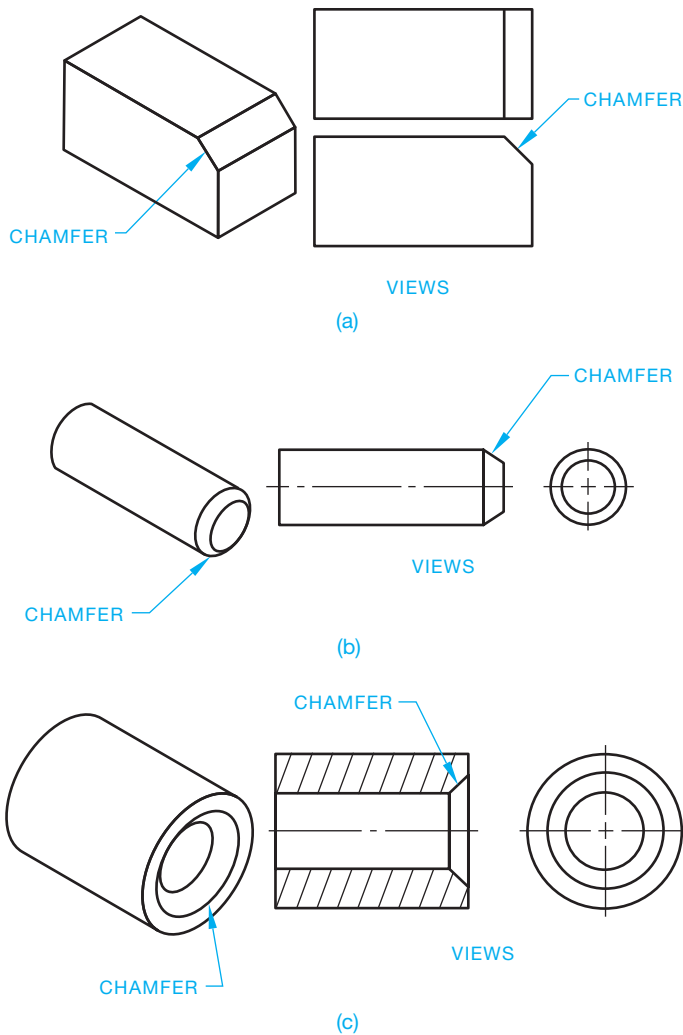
Chamfer examples. (a) Outside corner chamfer. (b) Chamfer of an external cylinder. (c) Chamfer on a hole.
